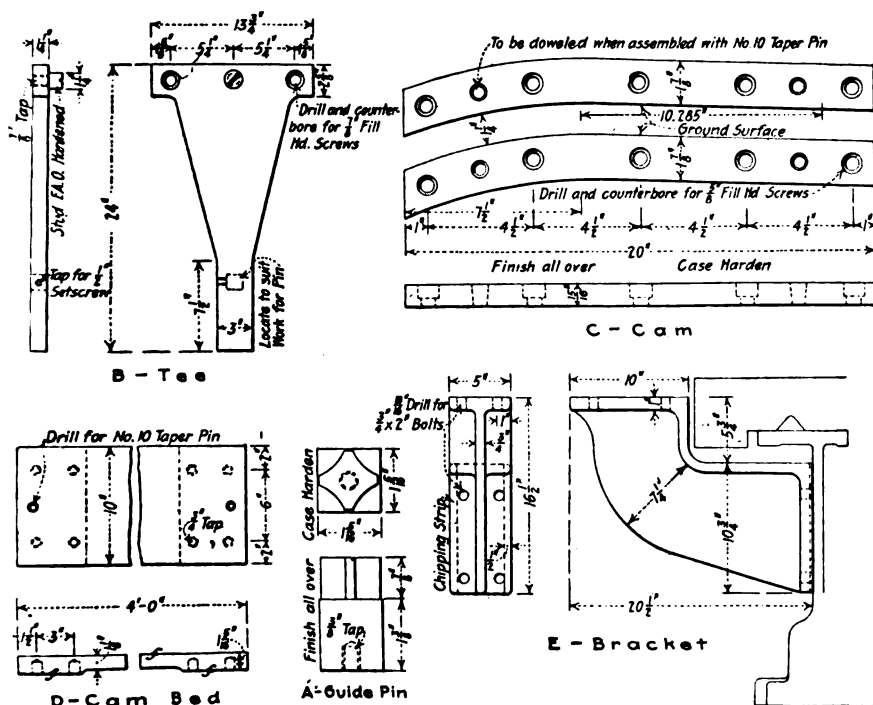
DETAILS OF CONTOUR MACHINING FIXTURES
